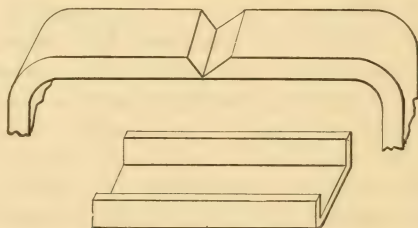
STORAGE BATTERY PLATE LUGS AND SOLDERING CLAMP OR TROUGH.
